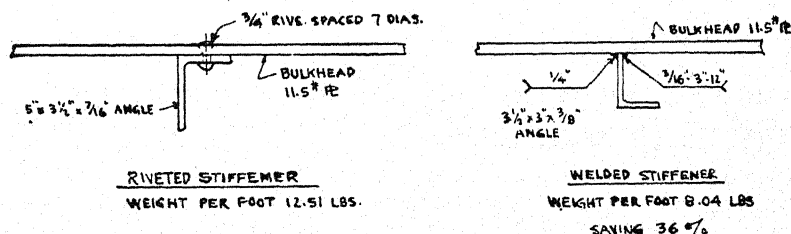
Comparative weight—riveted and welded bulkhead stiffeners.
